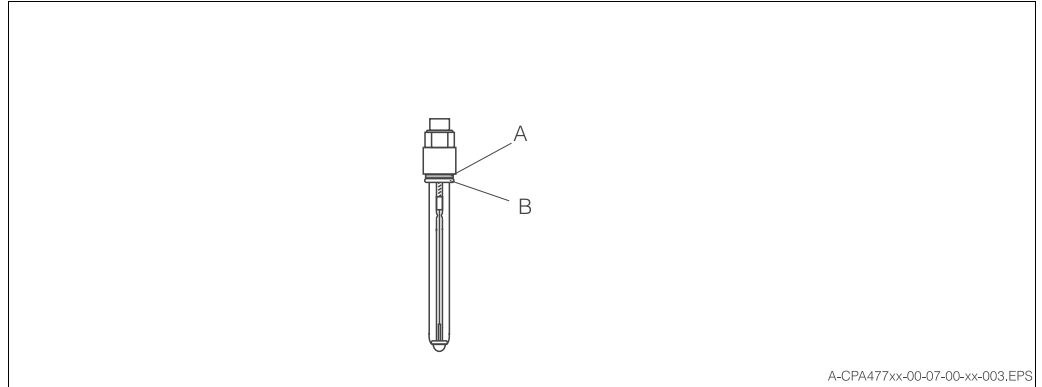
Thrust collar A and O-ring B on a gel electrode
